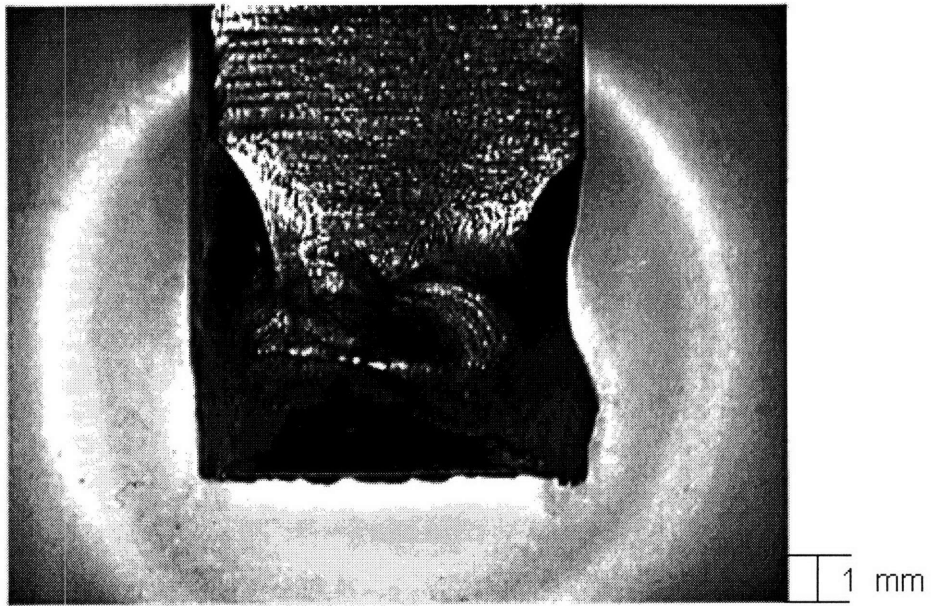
General view of specimen 2 weld fractured surface.
